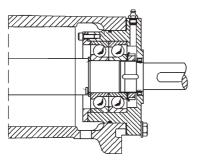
(3R, 4R and 5R) Grease-lubricated bearing assembly.
